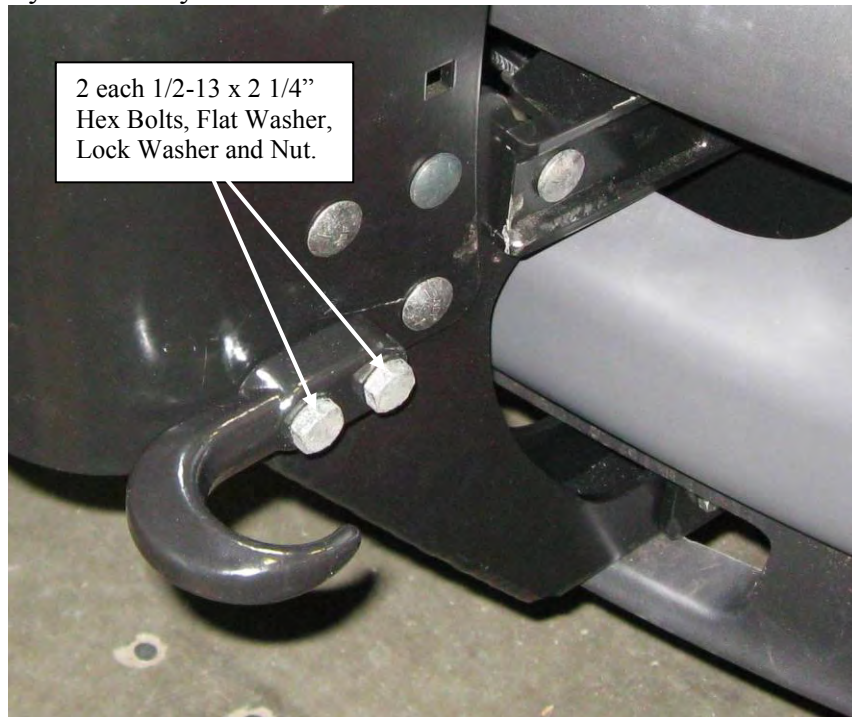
Large Frame Carrier: Tow Hook Bolt Positions.
